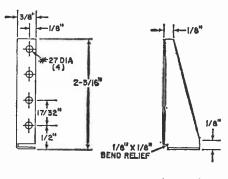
Details of switch support bracket. Two of these are required, one for each side mounting.
